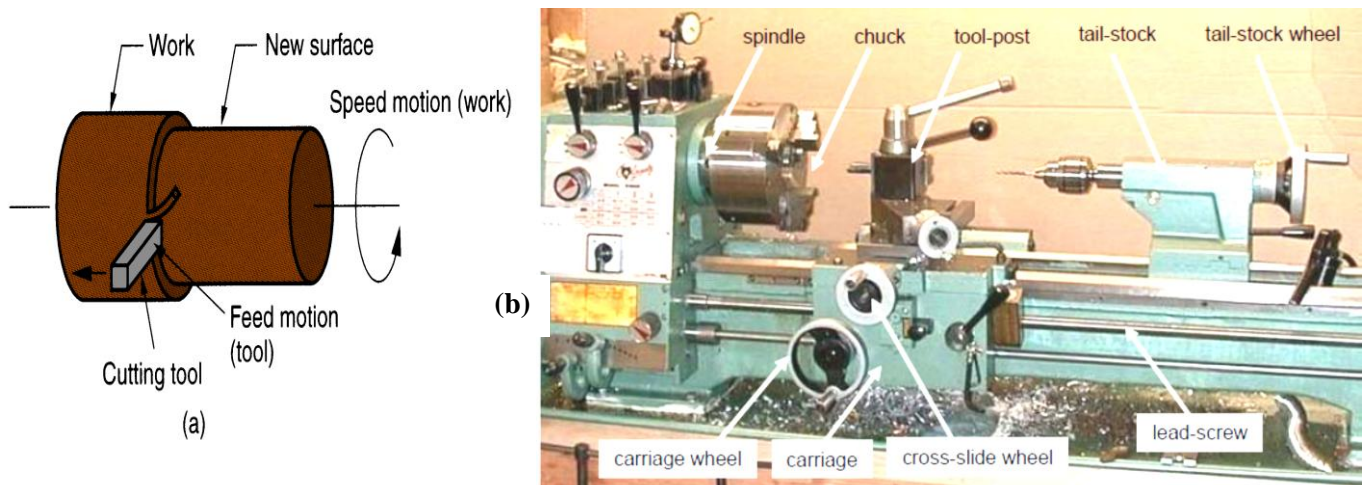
(a) Turning (b) A manual lathe with its important parts labeled
